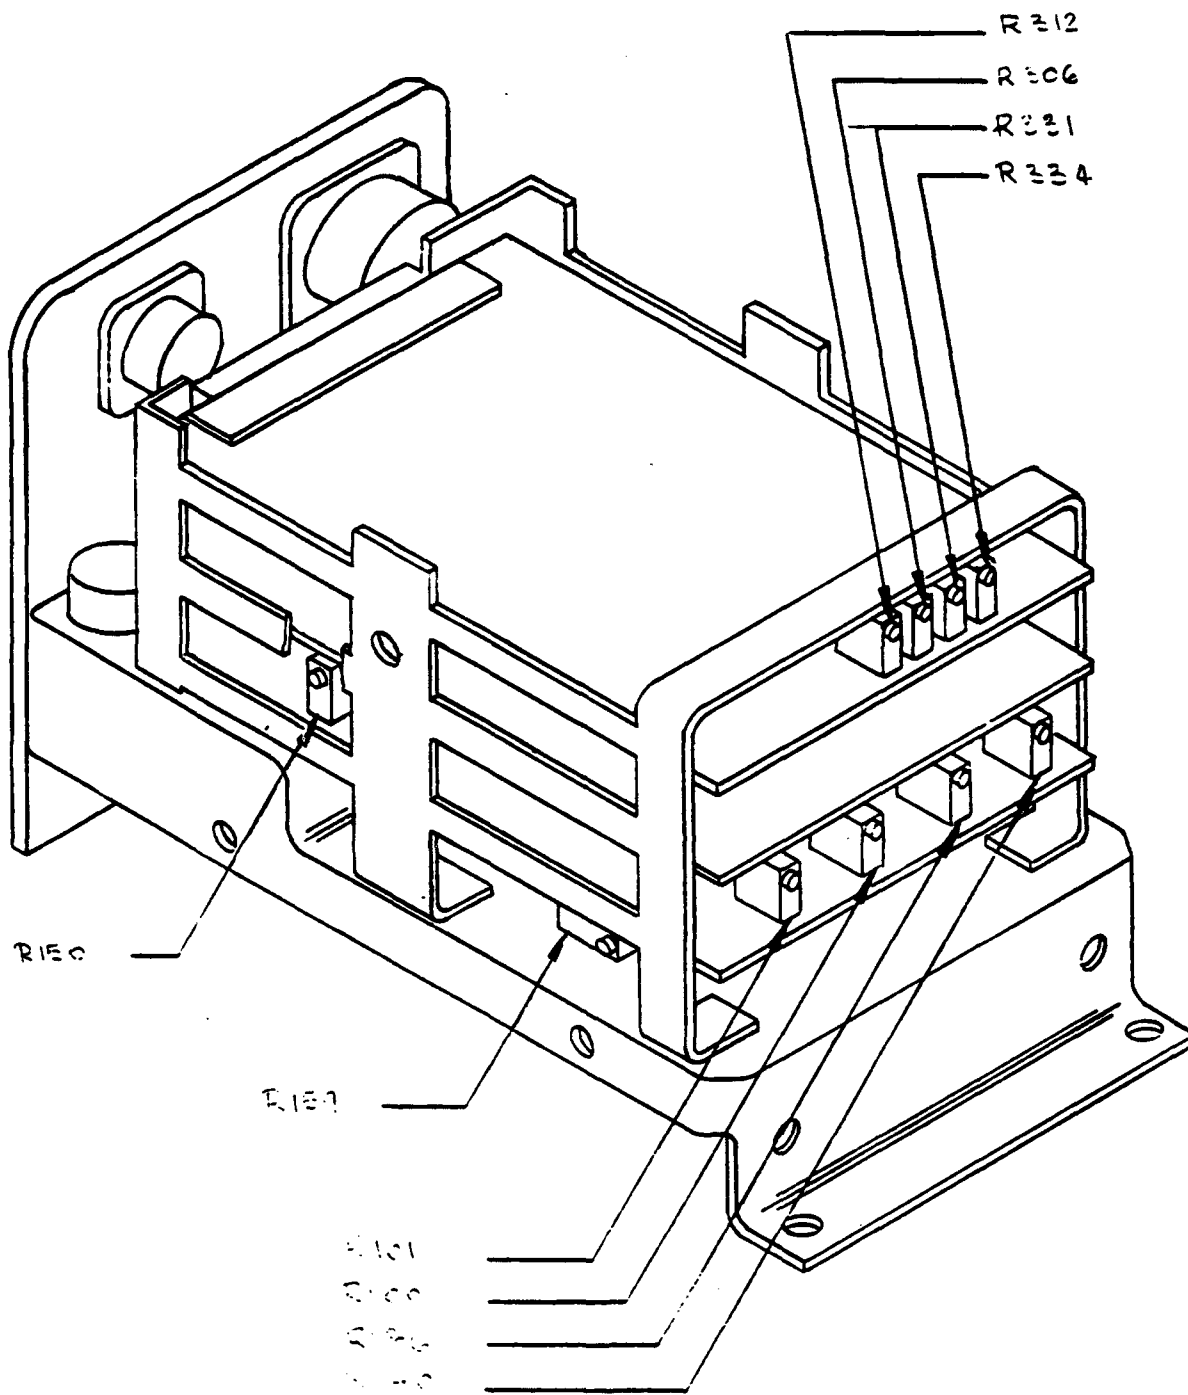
POWER SUPPLY UNIT (PSU) - FRONT VIEW
